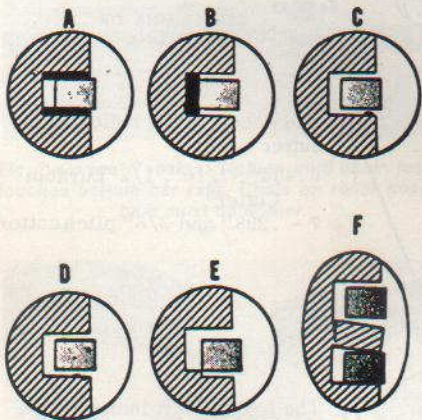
Examine piston for damage before removing old rings. Shown are some common faults.
